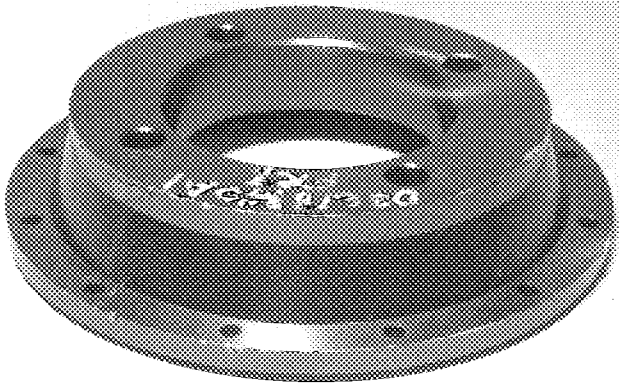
BRAKE CALIPER MOUNT TYPE 1
